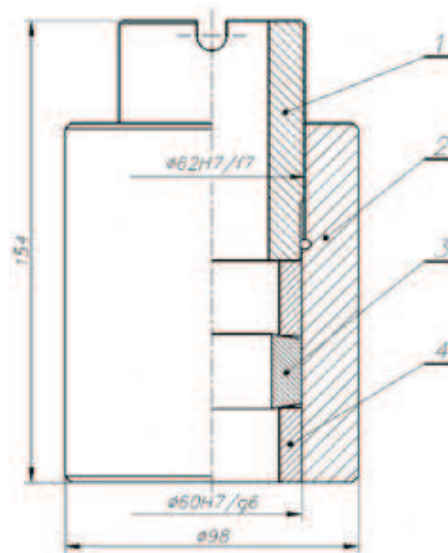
Test stand: 1 – stripper punch, 2 – holder, 3 – "2-delta" gasket, 4 – seats
